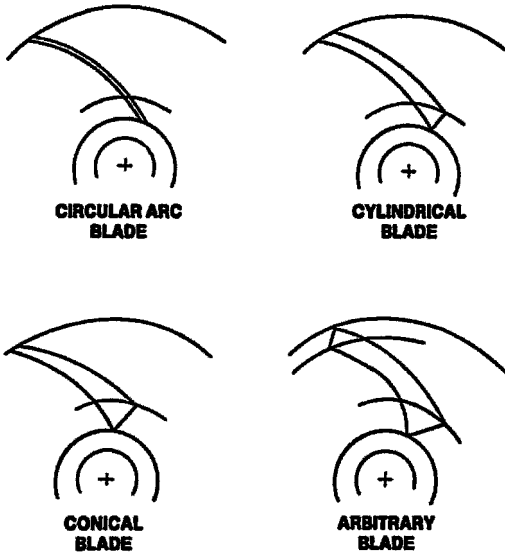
Impeller blade shape choices. (*Dresser-Rand Company, Olean, N.Y.*)
